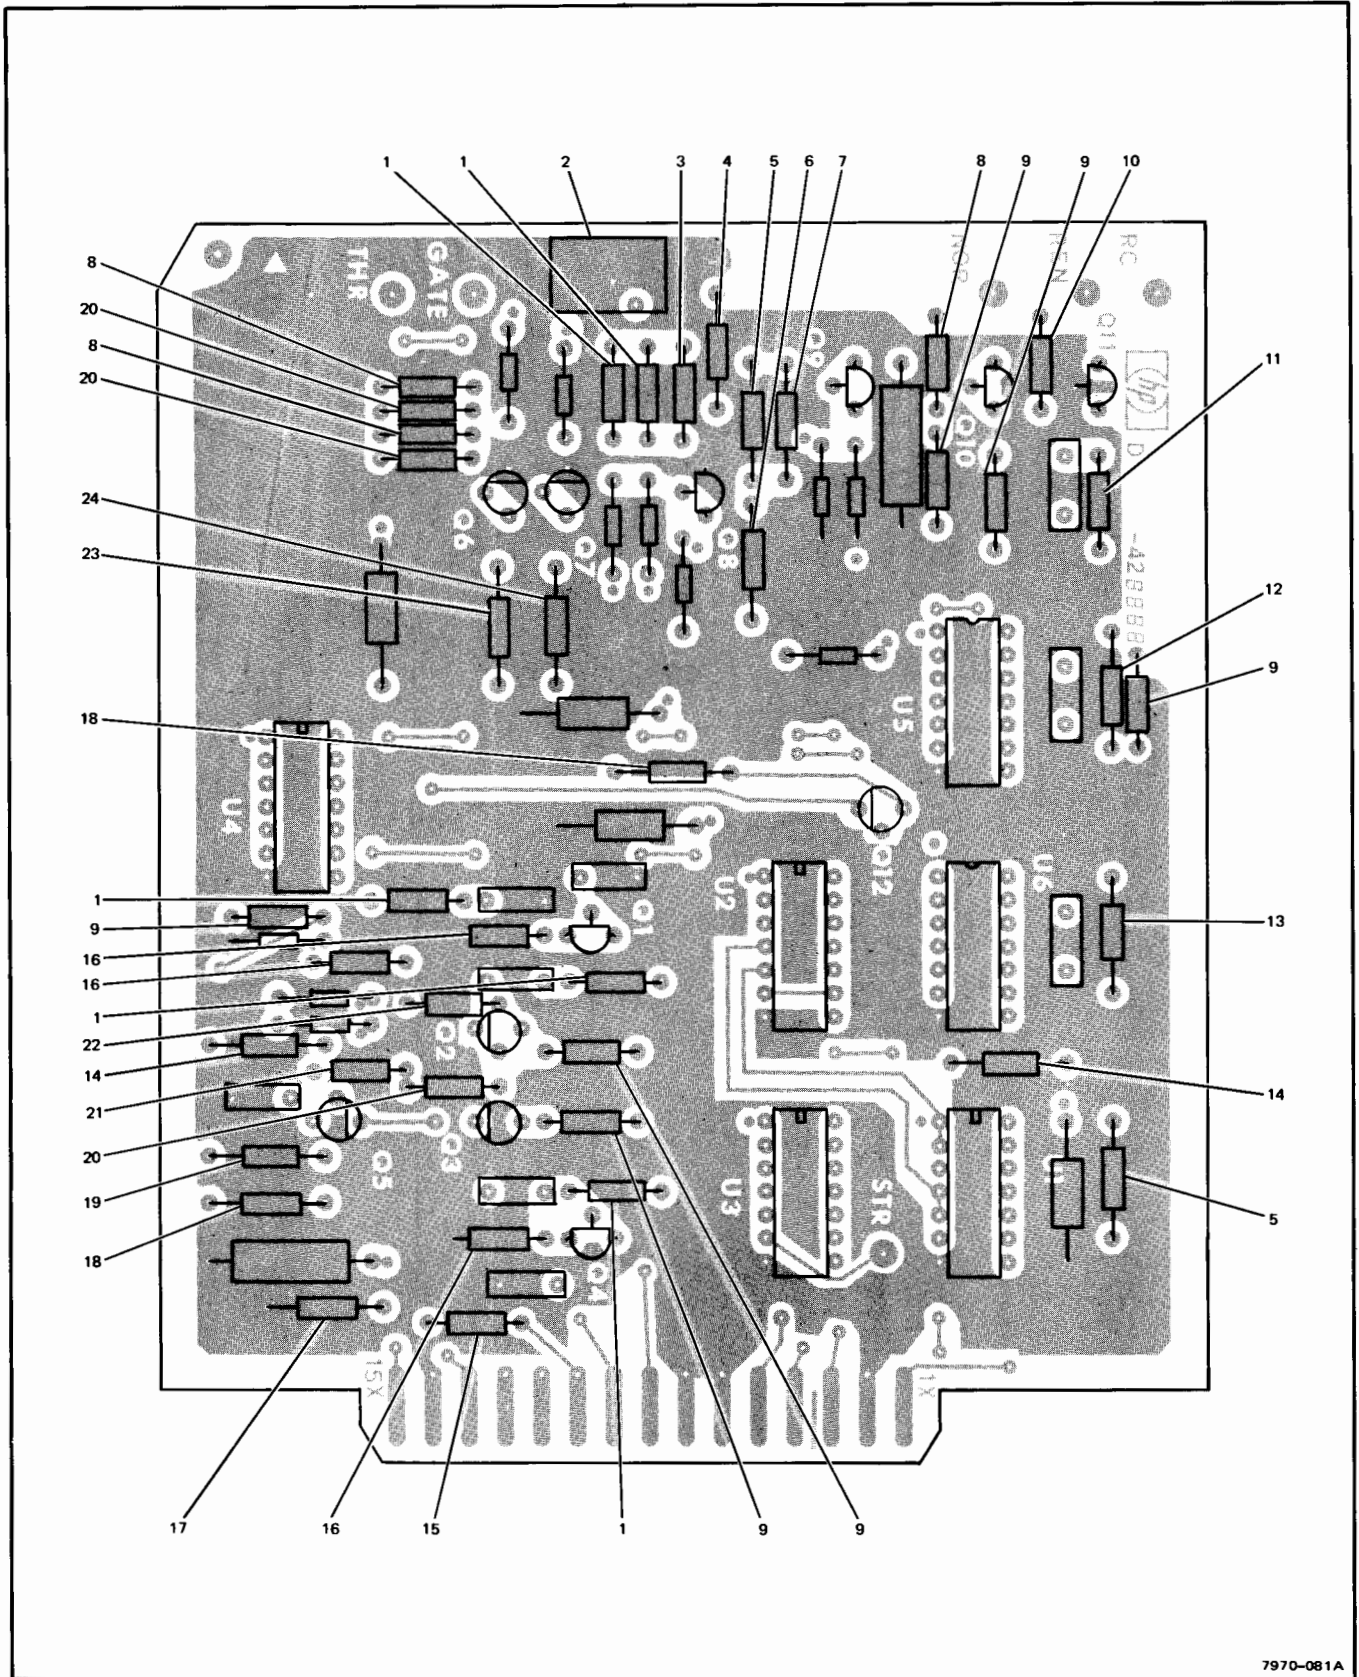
Read Control PC Assembly (Sheet 1 of 2)
